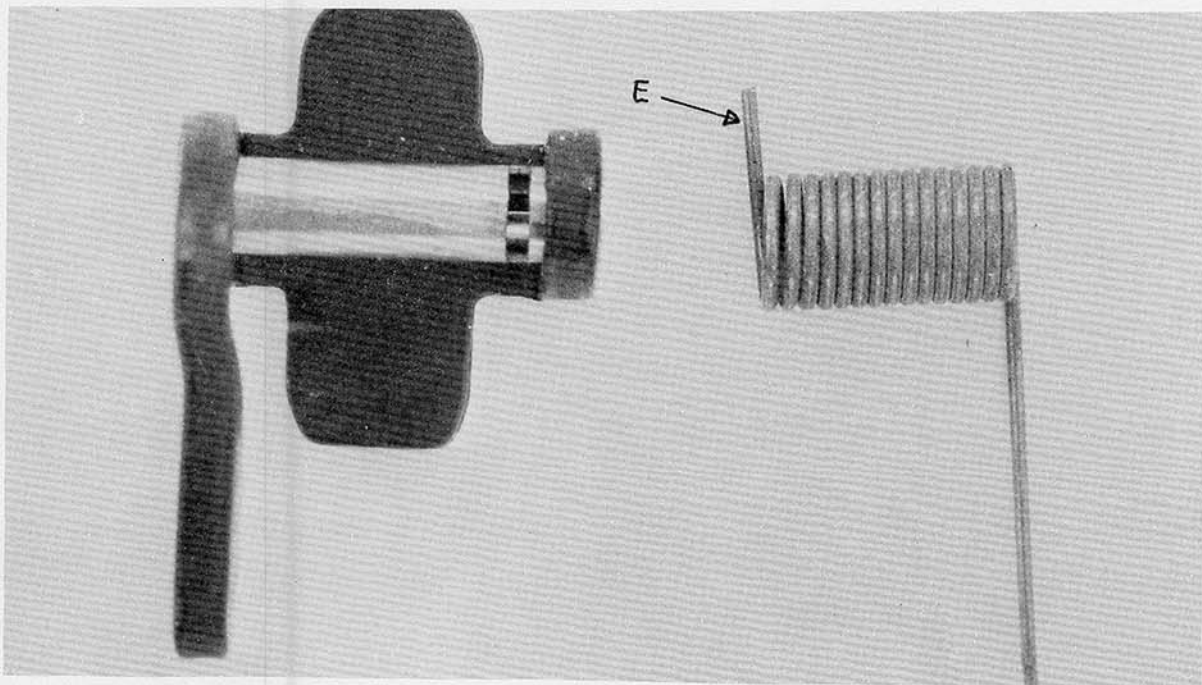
US supply automatic sear assembly partially disassembled (packaging marked A-1-69-BK4).
